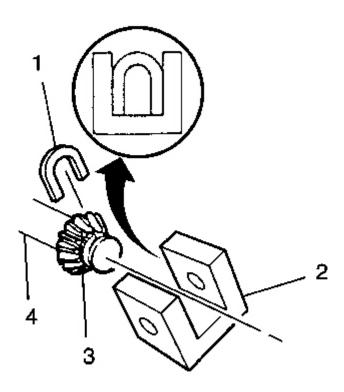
View Of Axle Shaft, Lock & Thrust Block Courtesy of GENERAL MOTORS CORP.
